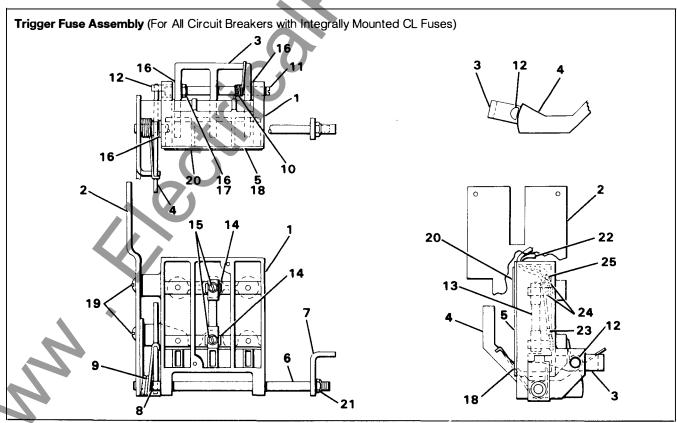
Open Fuse Trip Device, Trigger Fuse Assembly
